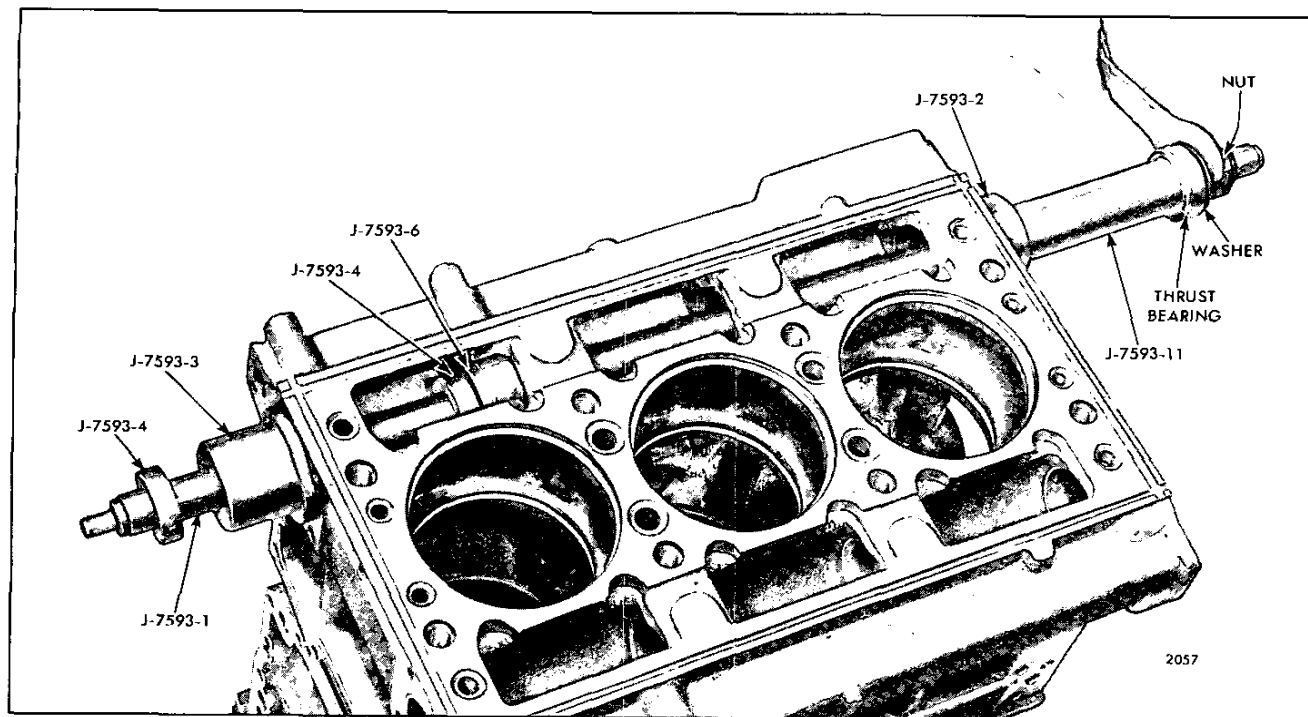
Installing Intermediate Camshaft Bearing Using Tool Set J 7593-03
